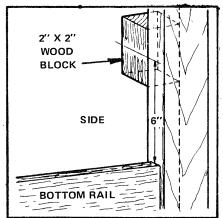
mount the wood block on the side of the piano as shown.
